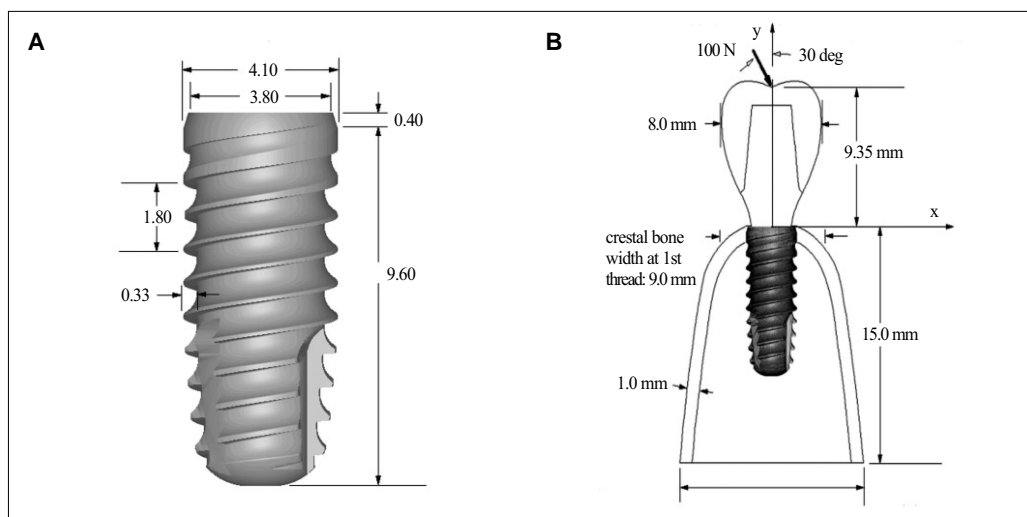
Schematic presentation of the implant/bone complex shown in a bucco-lingual aspect showing. A: detailed dimensions of the submerged type fixture, B: basic dimensions of the implant/bone complex.
